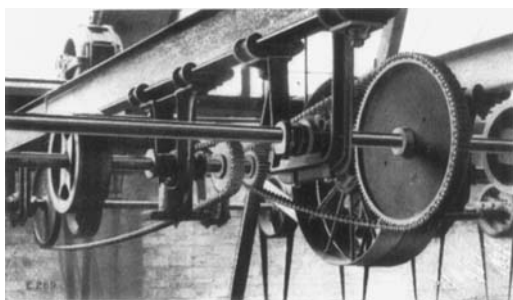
Shafting to Shafting by Noiseless Drive Chain.
